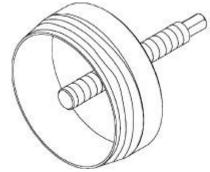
REMOVER, SEAL - 8506 Courtesy of CHRYSLER LLC
